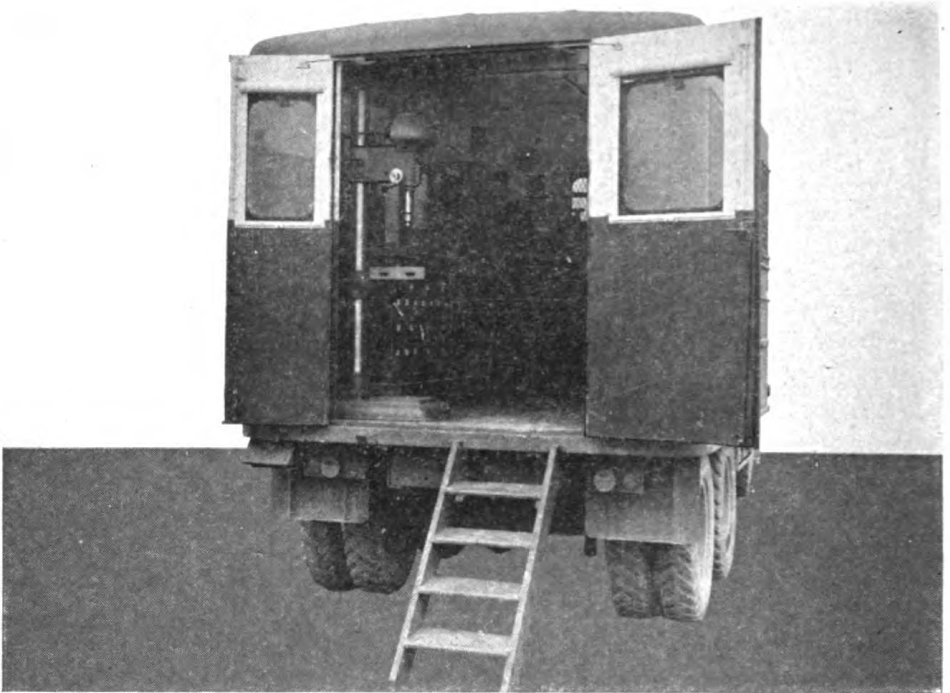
Shop equipment, third-echelon, motorized: set No. 4, machine-shop, heavy.
